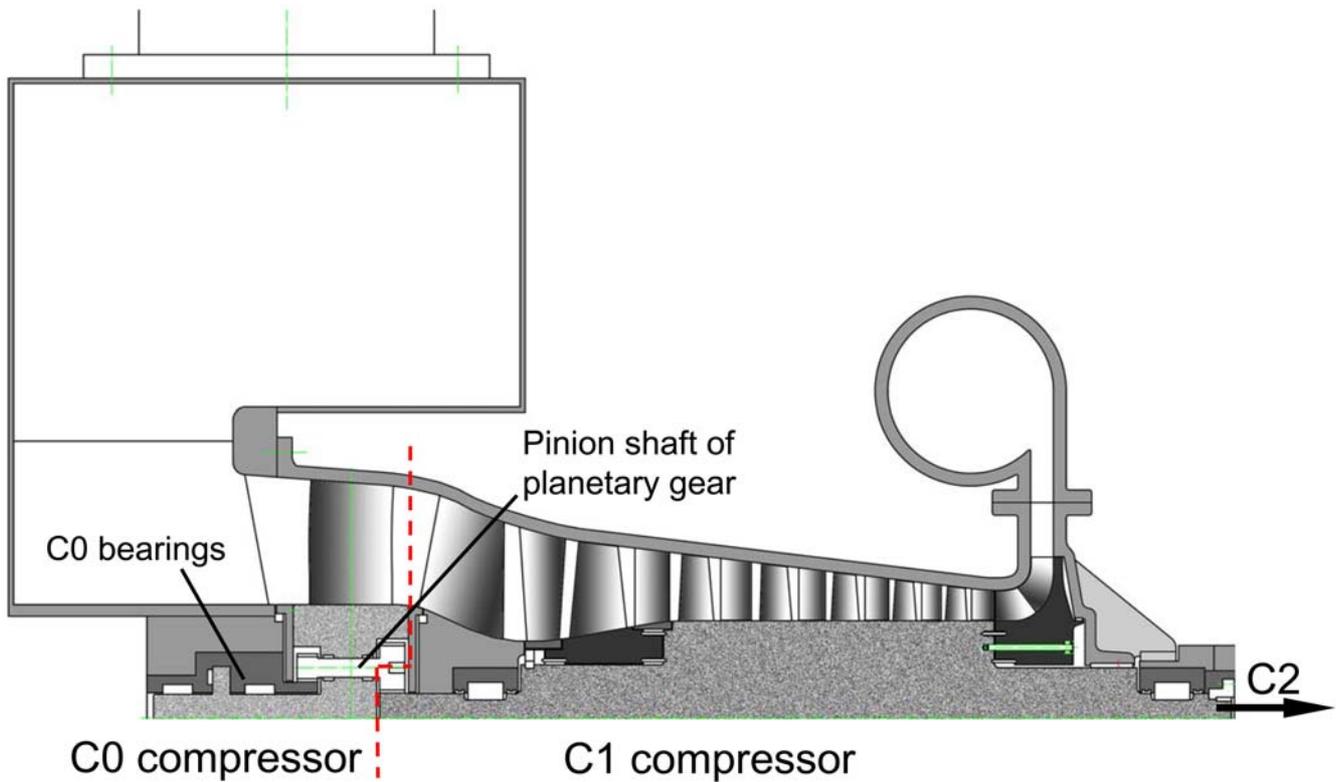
Design of pre-compressor C0 and compressor C1 connected via a planetary gear
